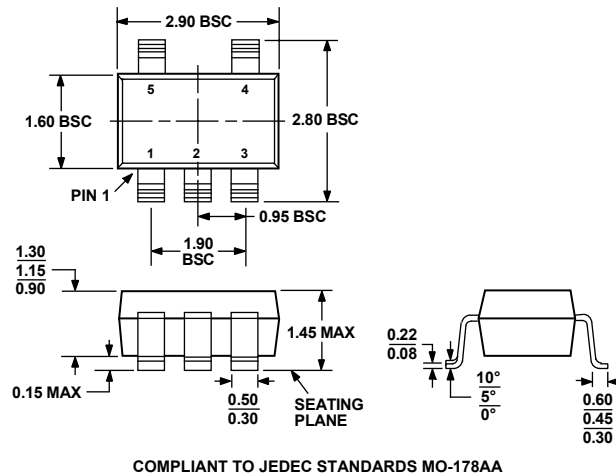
5-Lead Small Outline Transistor Package [SOT-23] (RJ-5)
